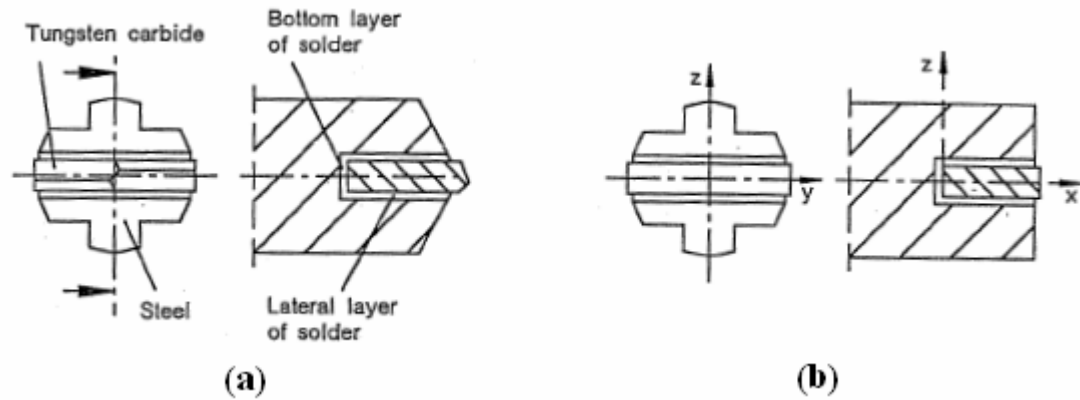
(a) Typical drill head, (b) Simplified drill head geometry [27].
